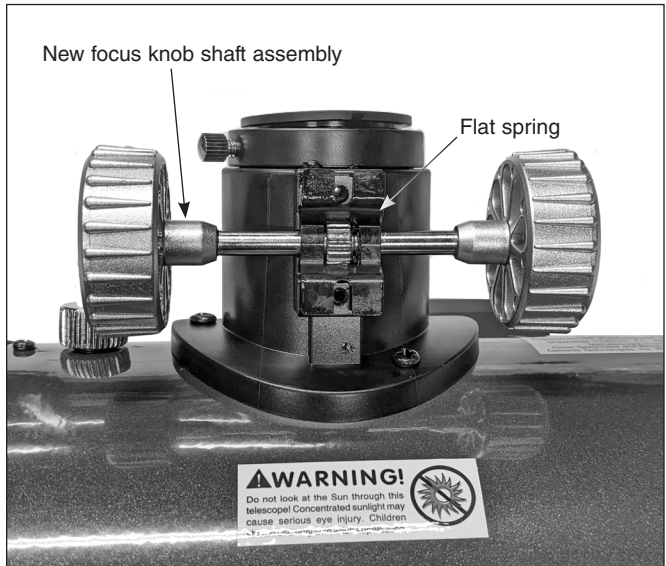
Take the new focus knob shaft assembly included in this kit and place it on the focuser. Be sure the rack and pinion gears are aligned. Next, place the flat spring over the shaft so that the curved portion bends inward as shown in the image above. If the flat spring is placed backwards you will not be able to re-install the cover plate as described in the next step. Reseat the cover plate and re-tighten the Phillips head screws in reverse of step one. It is recommended to alternate the screws you are tightening every couple of turns to ensure they are equally tightened.
